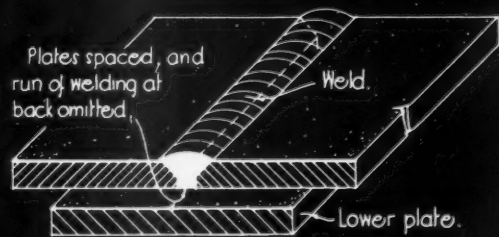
V-WELDING PLATES WITH PLATE UNDER.
